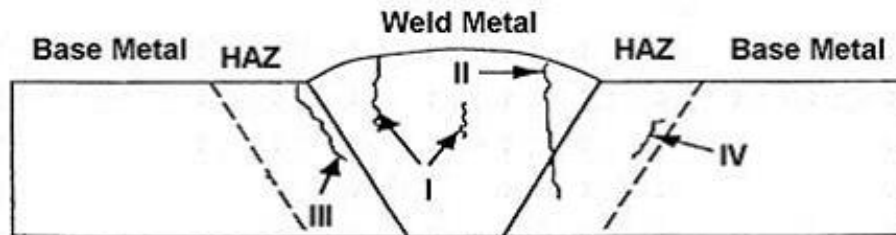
Classification of cracks in a weld joint (Molokwane; 2014)
